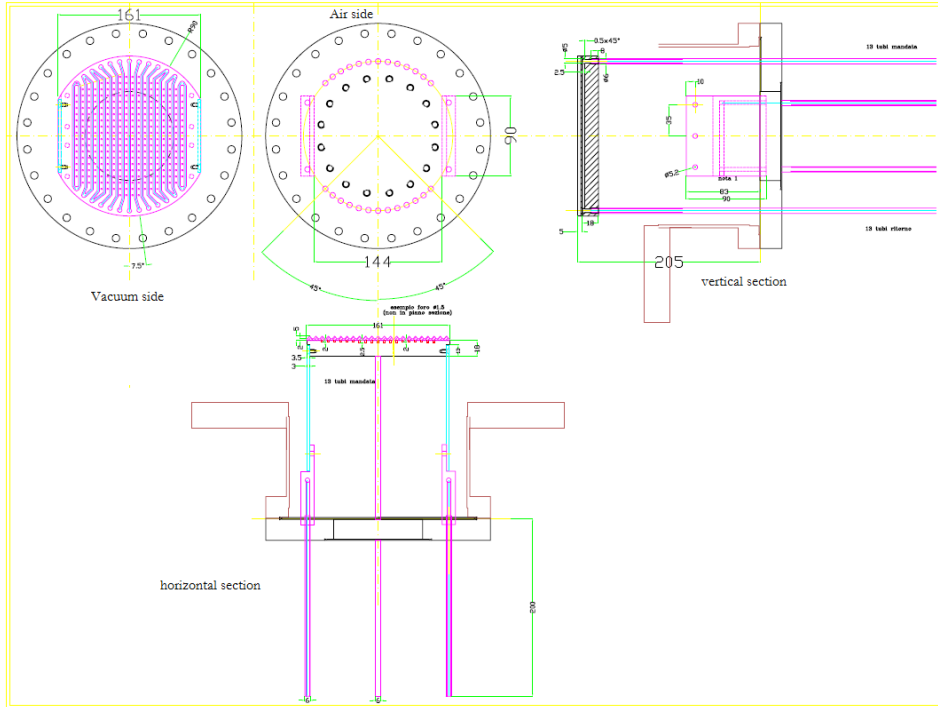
Drawing of the calorimeter designed for NIO1.
